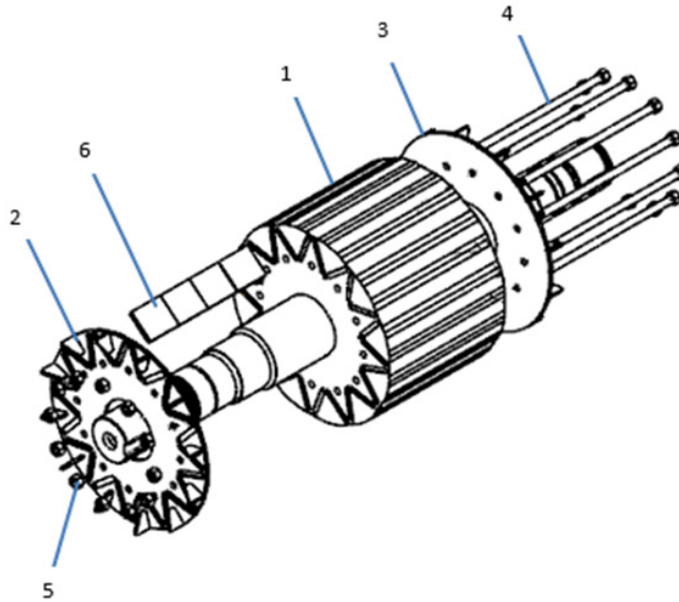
Exploded view of a permanent magnet rotor. Numbers showing where the different components are positioned. More detailed info in Table 2.
